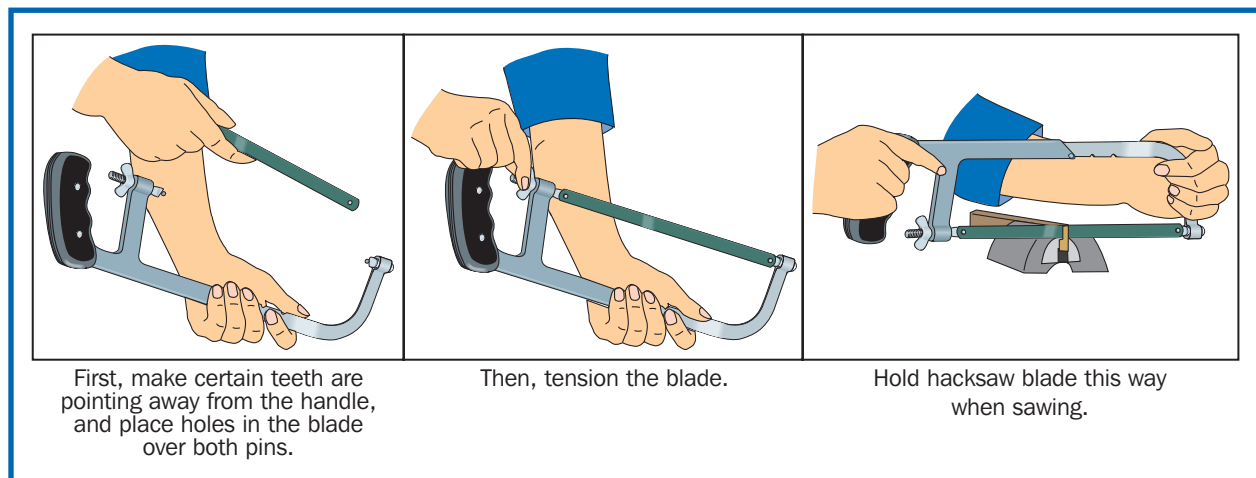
Installing a blade and proper holding of the hacksaw.
